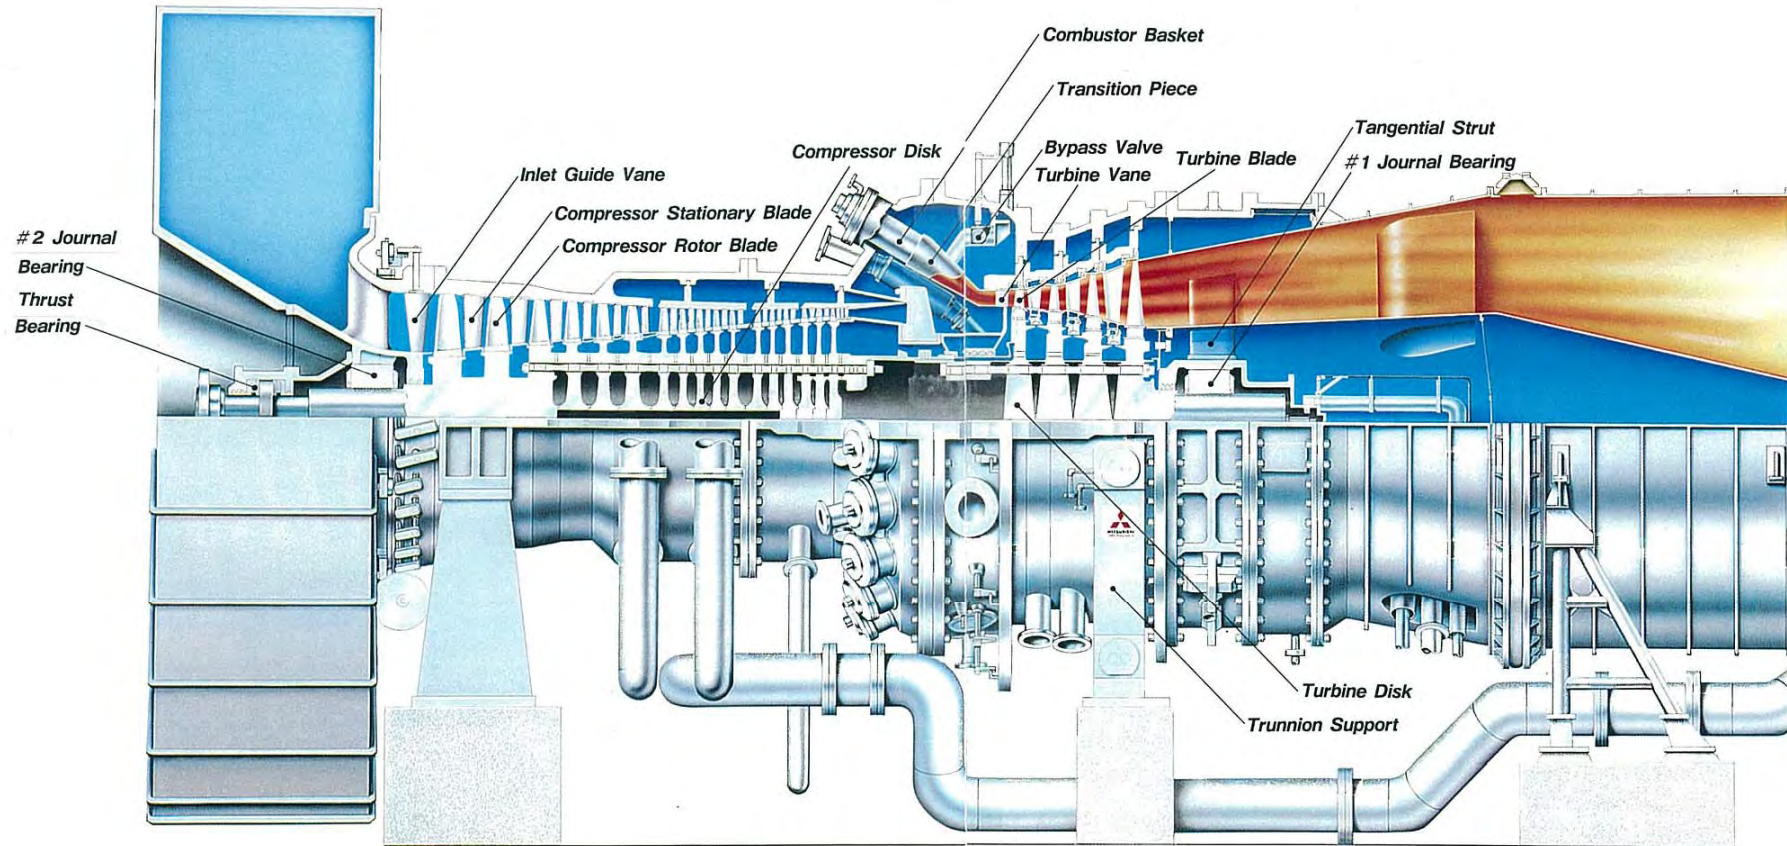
Longitudinal Section Drawing of Typical F-class Gas Turbine
